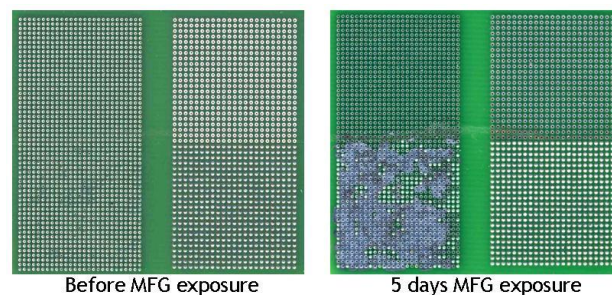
Board assembled with solvent based ORL0 wave soldering flux
